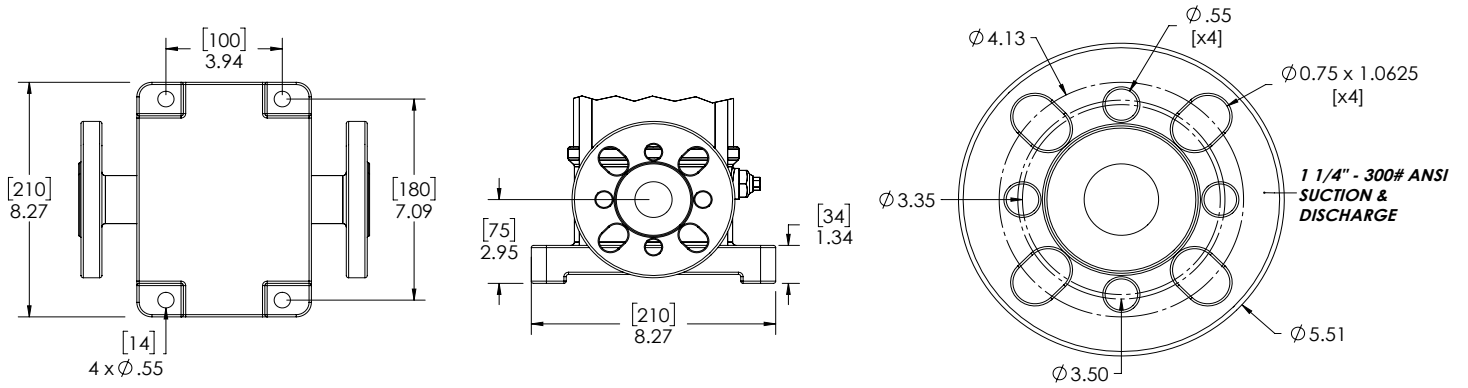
MVI - 50, 75, 100 Flange/Footprint
